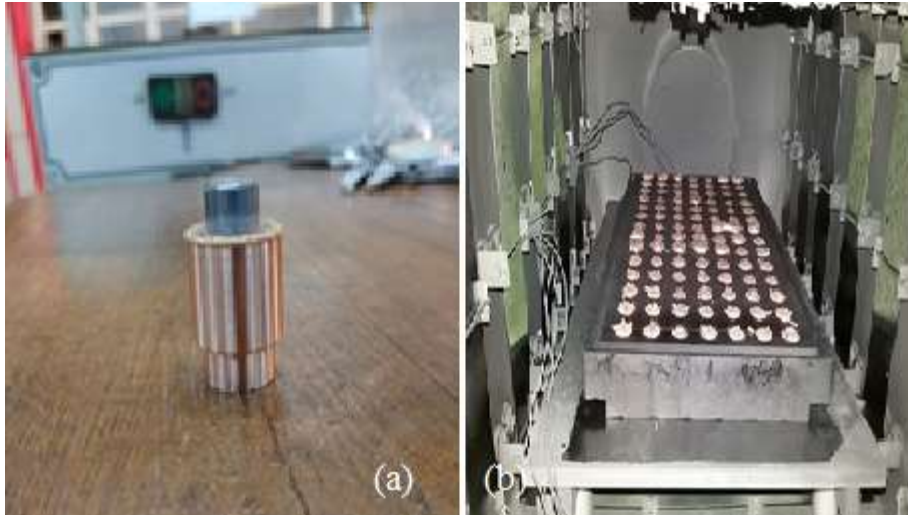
Photograph of copper casted tungsten rod (a) and batch production of copper casting(b).
